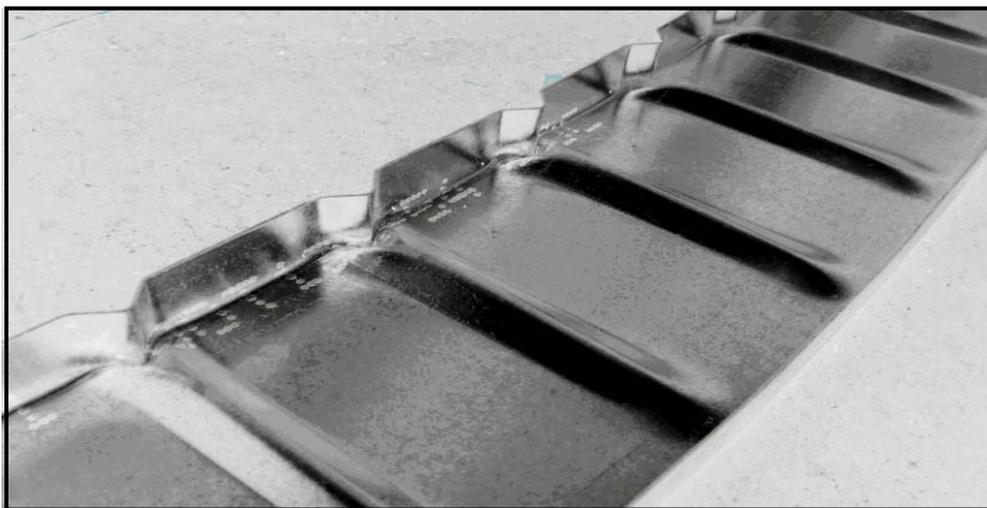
Photo of a section of the crimped bottom wall plate, showing “cells”.
